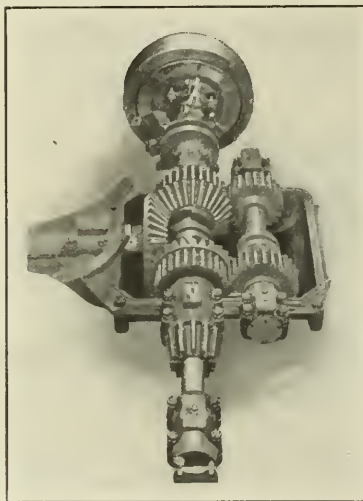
Master Clutch and Transmission Assembly of 75-horsepower Tractor
